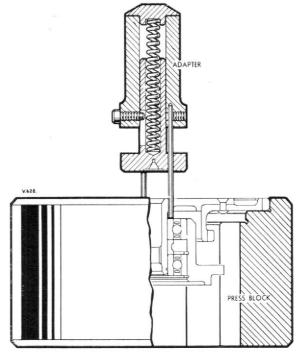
Press block T.77660 and three-pin adapter T.77661 for pressing off bearings and housing from tachometer gear.
